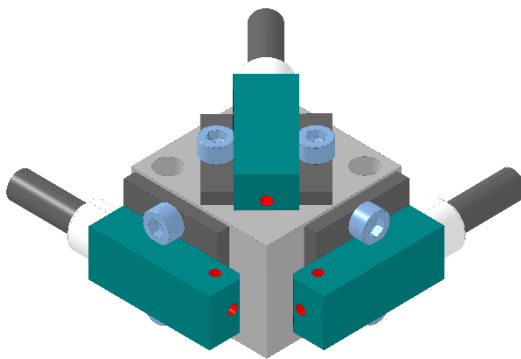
Mounting block for three uniaxial 64x-2000-360 accelerometers.
